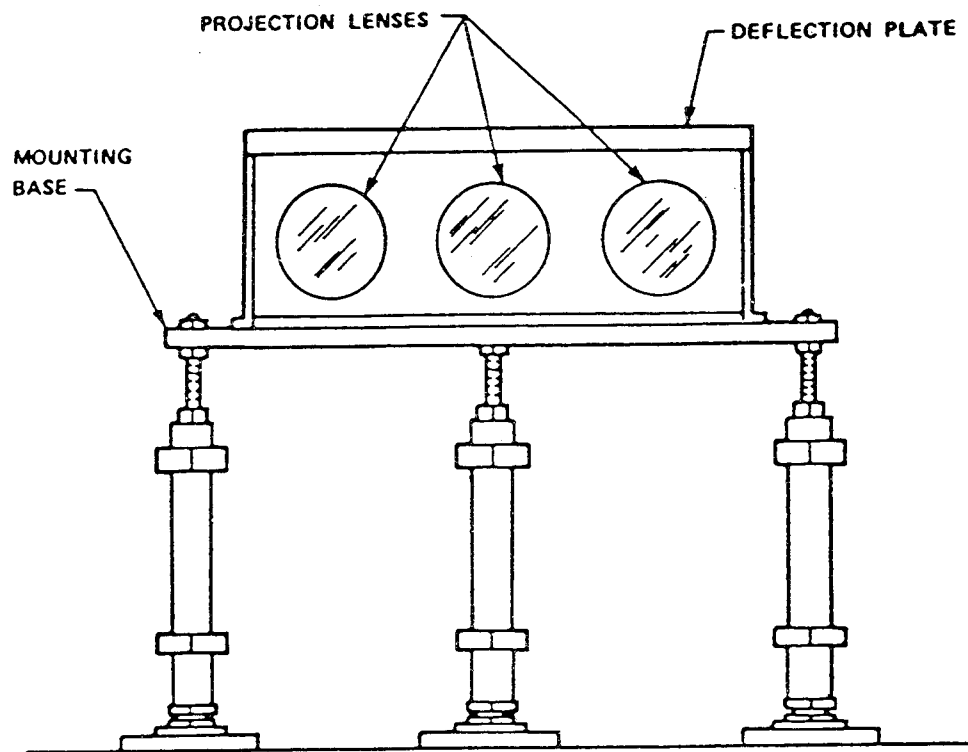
LAMP HOUSING ASSEMBLY (FRONT VIEW)
